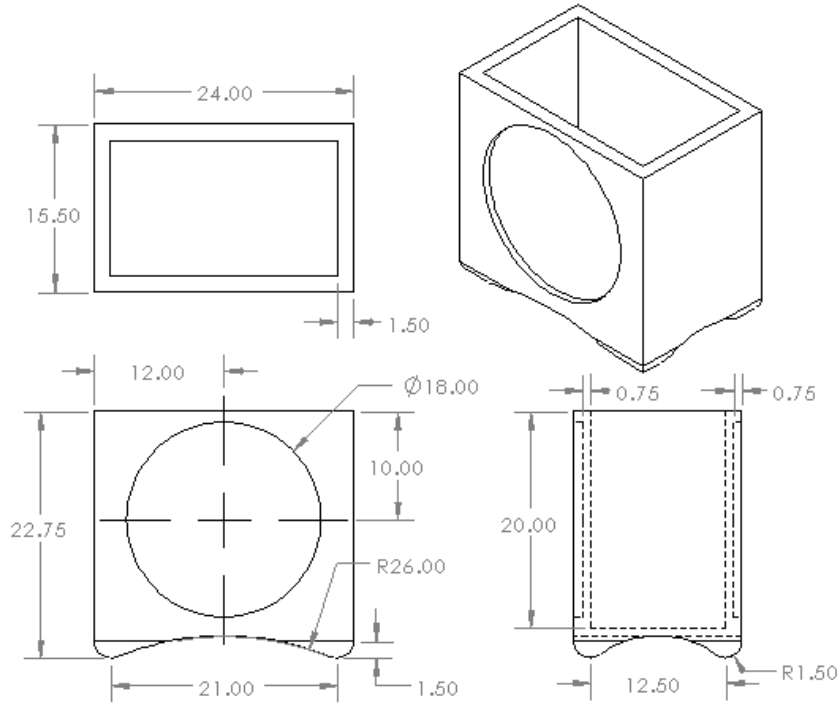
Technical drawing containing the dimensions of the PLA 3D printed mold used for ultrasonic testing.
